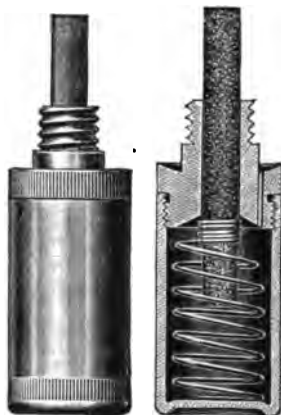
SEC. 7e.—Type of wick feed oil cup which is used in electric fans.
